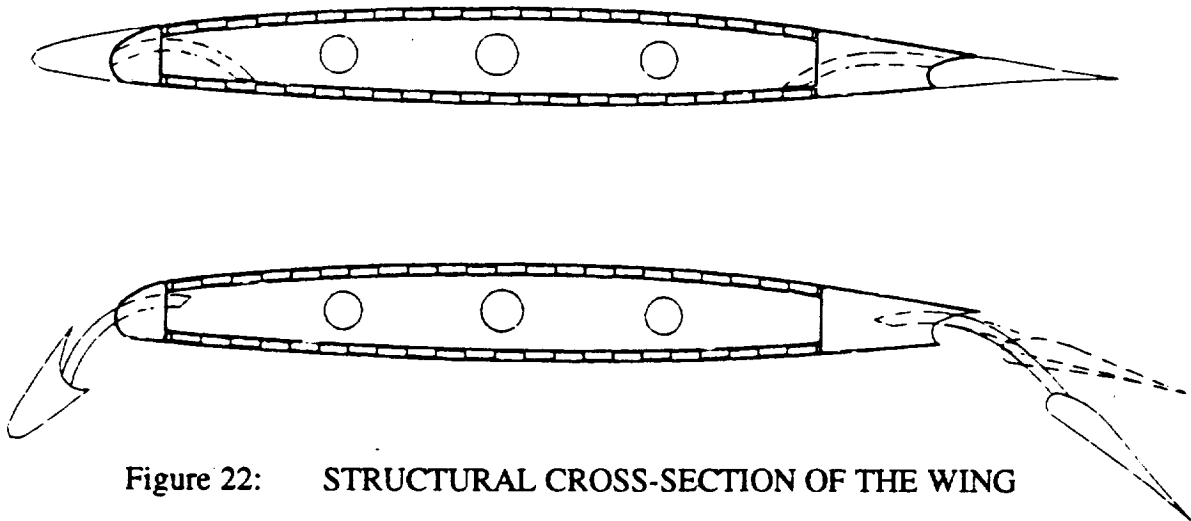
STRUCTURAL CROSS-SECTION OF THE WING
